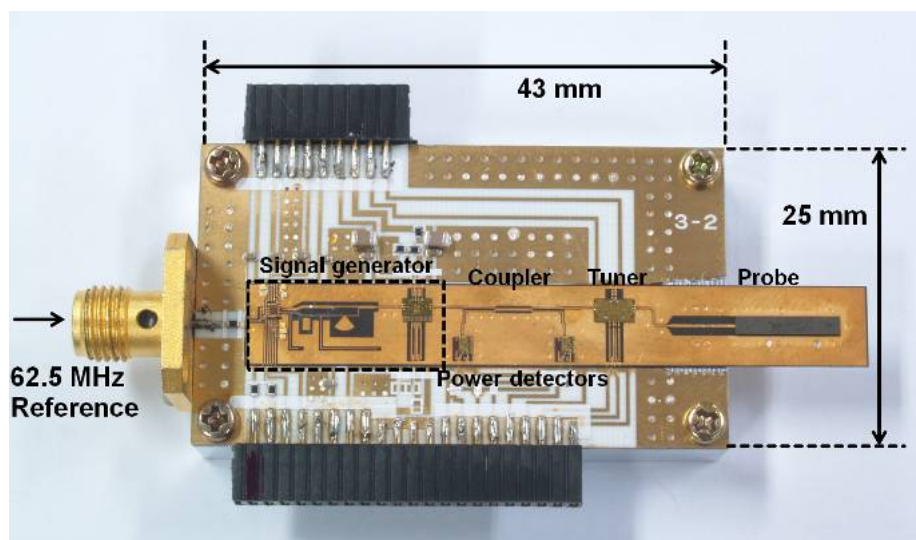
Photograph of the entire MSR module assembled on the PCB with the connectors installed.
